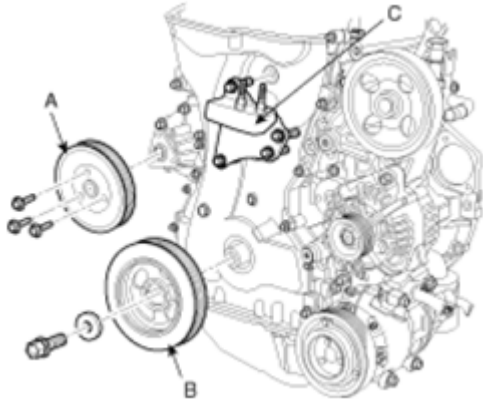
Identifying Water Pump Pulley, Crankshaft Pulley, & Engine Support Bracket
